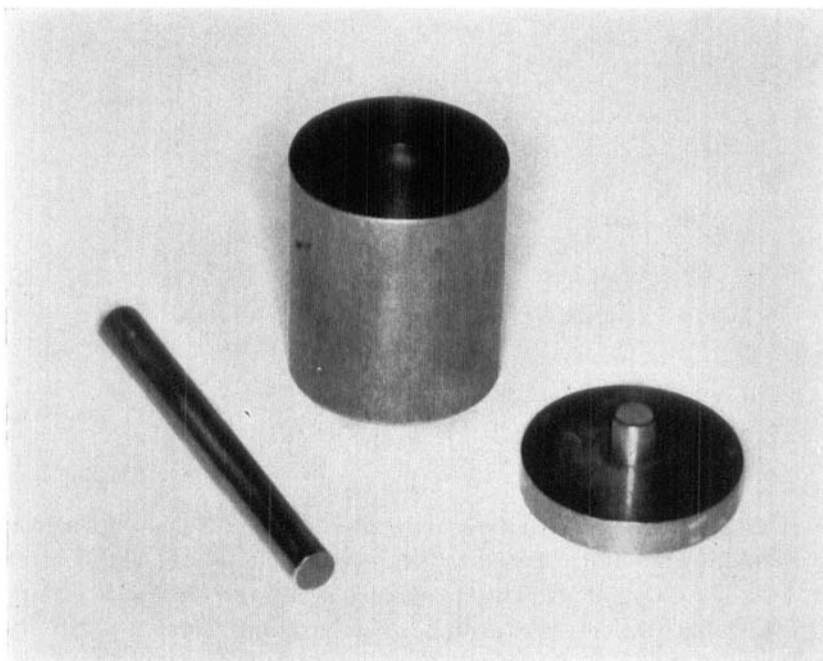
Cylindrical steel mold with upper and lower piston used for the preparation of test specimens.
